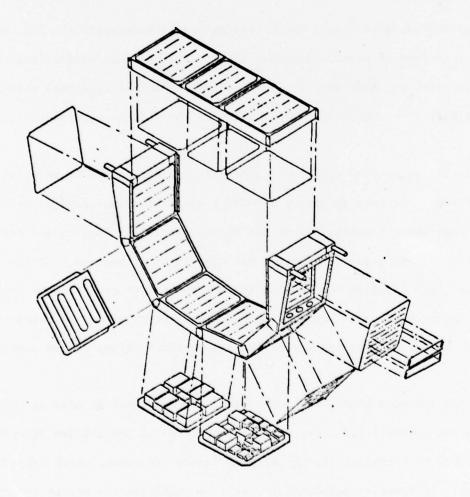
EXPLODED VIEW OF STANDARD TEST RACK
